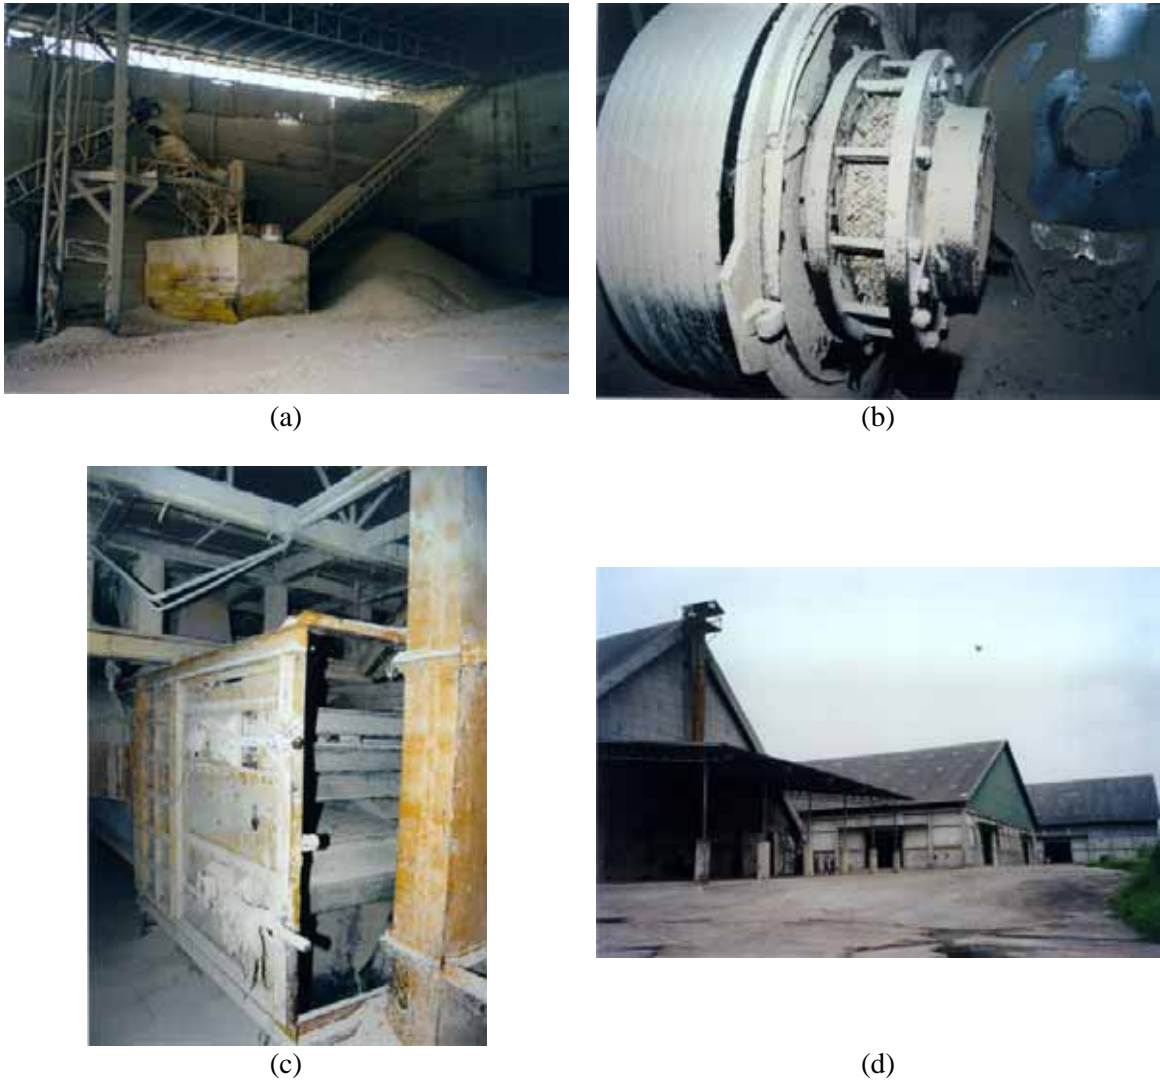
Pellets processing : (a) Grinding of chips by hammer mill (b) Extrusion (through a die press) (c) Cooling chamber and (d) Storage of pellets
